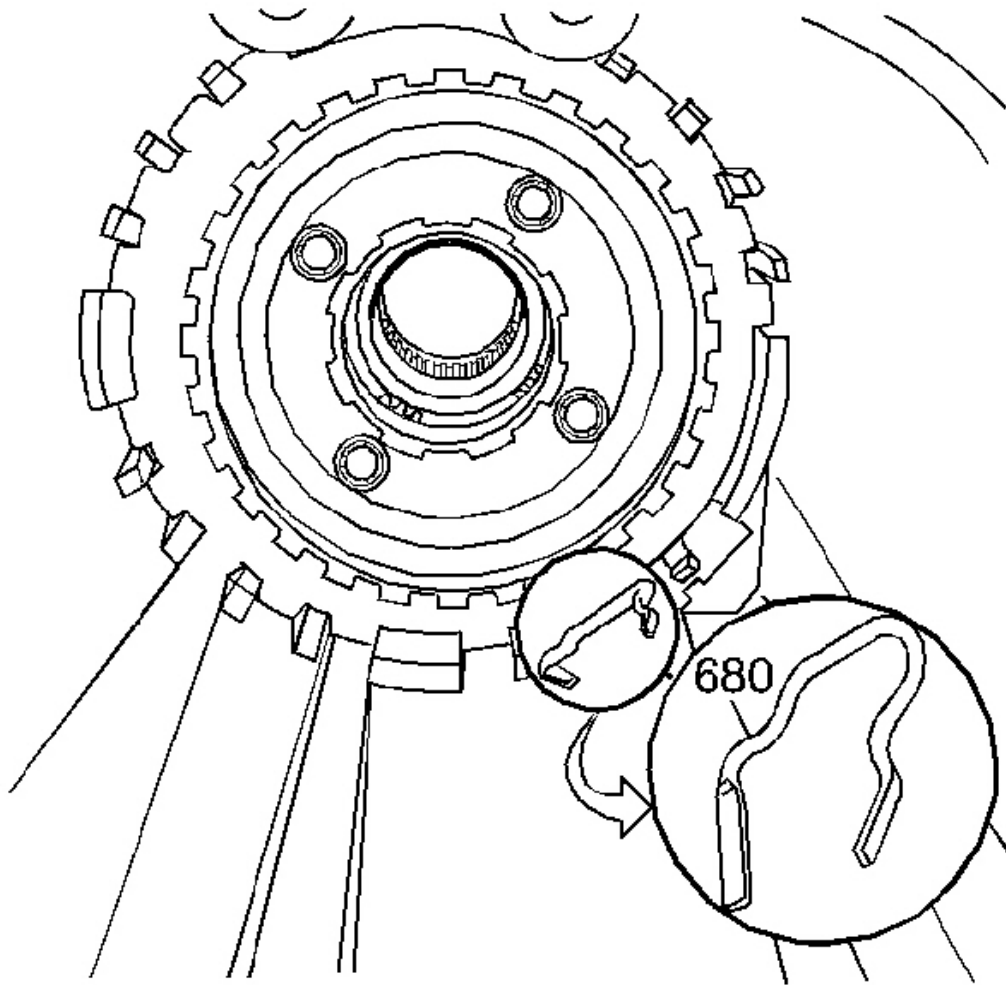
View Of Low And Reverse Clutch Support Retainer Spring
